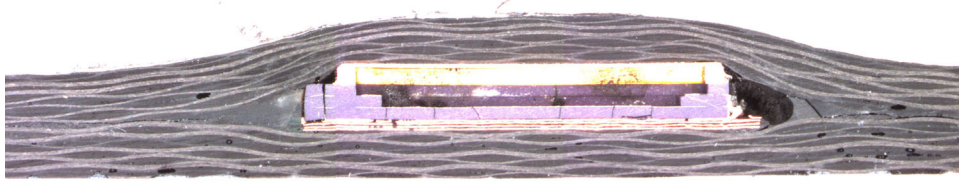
Cross-sectional view of the specimen after failure.
